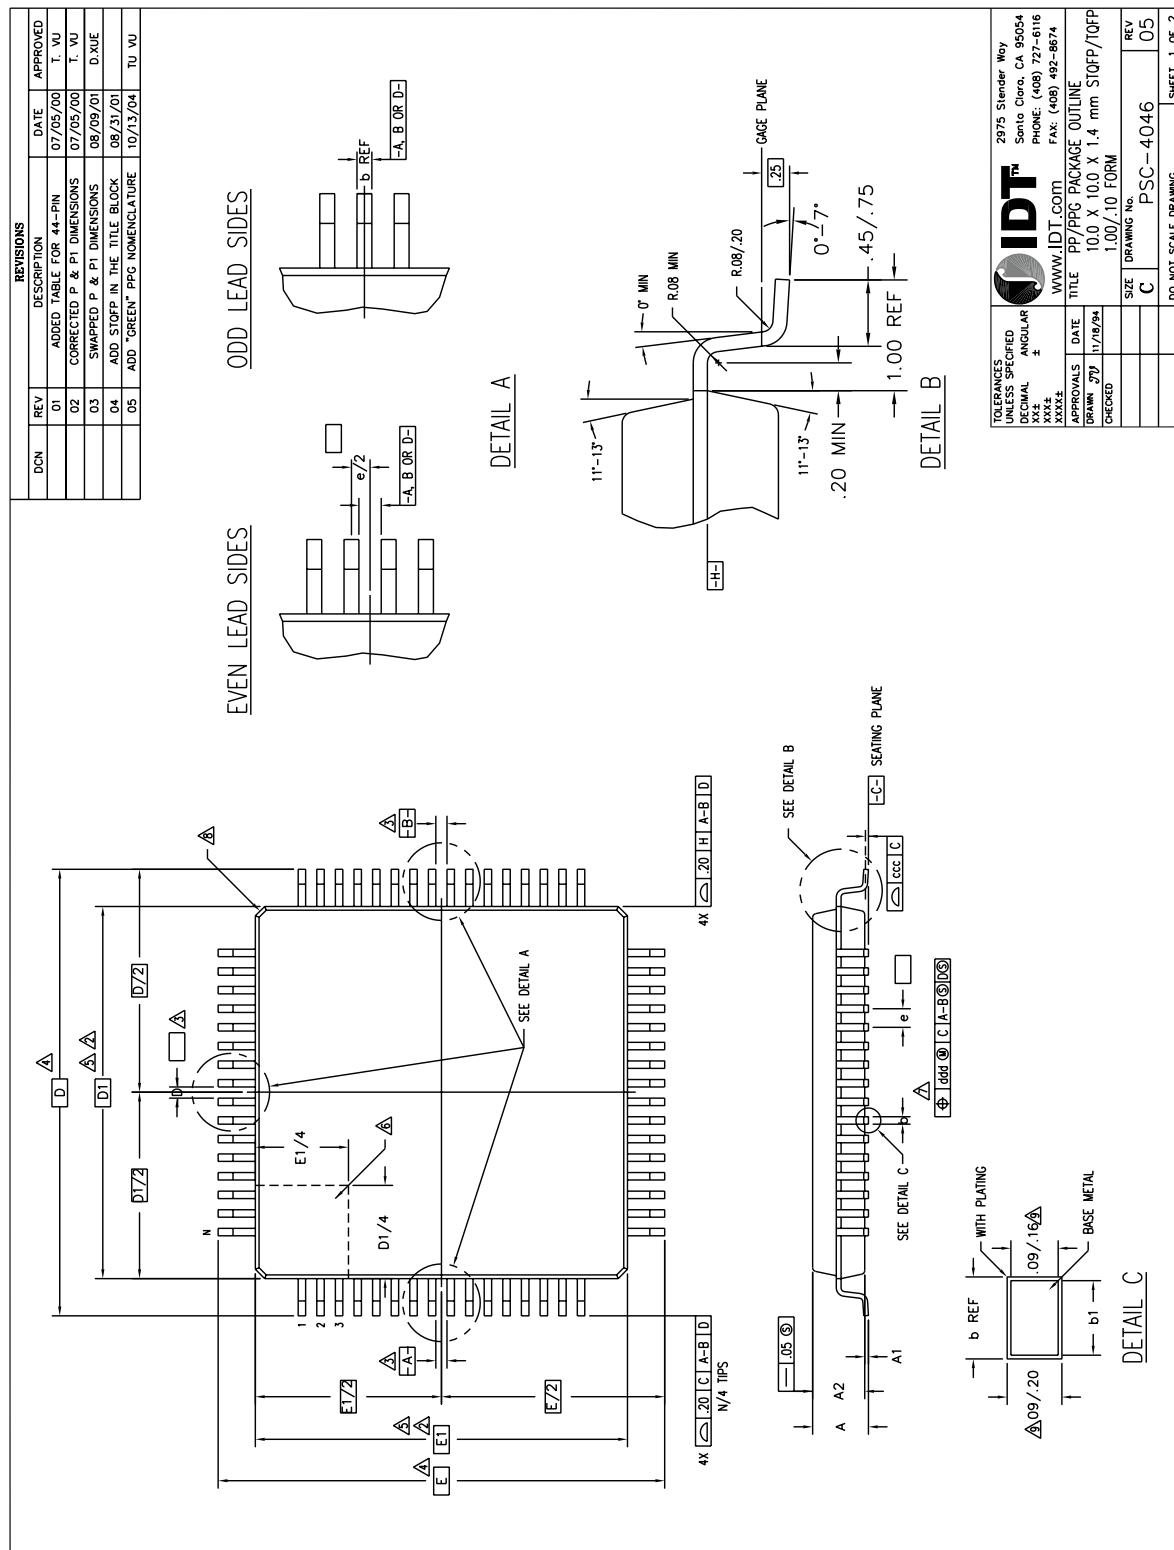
64-Pin PP Package Dimensions (a) (in Millimeters)
